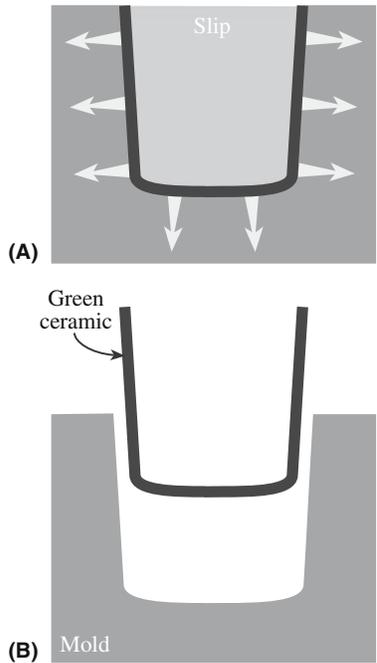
Schematic illustrating the drain-casting process. (a) Fill the mold with slip; the mold extracts liquid, forming a compact along the mold walls; (b) after excess slip is drained and after partially dried, green ceramic is removed.
